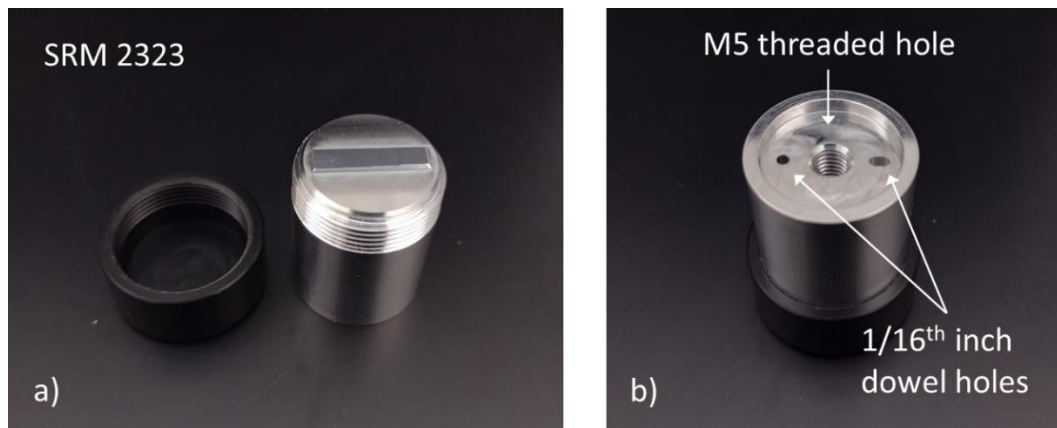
a) SRM 2323 step height standard with nylon protective cap on the left and SRM on the right, b) Bottom view of SRM 2323 showing dowel mounting holes and a threaded M5 hole.
